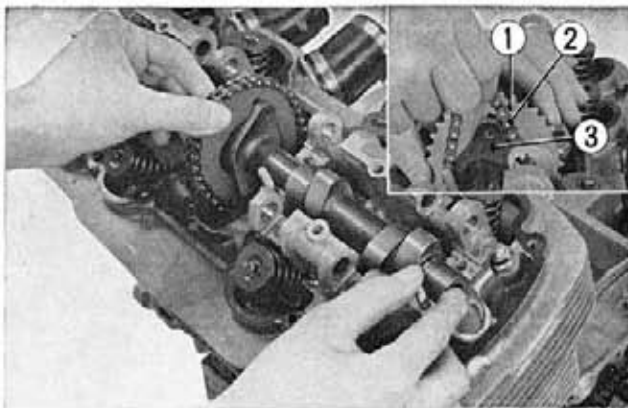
① Cam sprocket ③ Cam shaft
